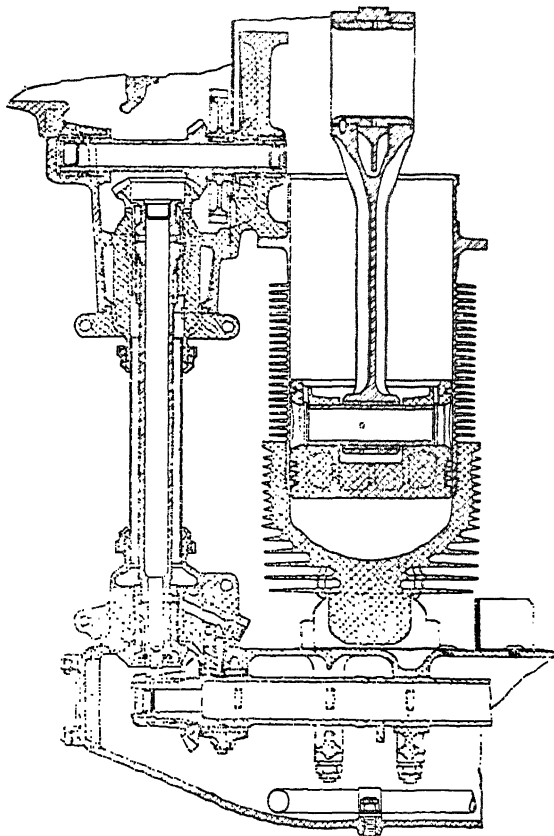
Camshaft and drive of the "Ranger" inverted type engine.
